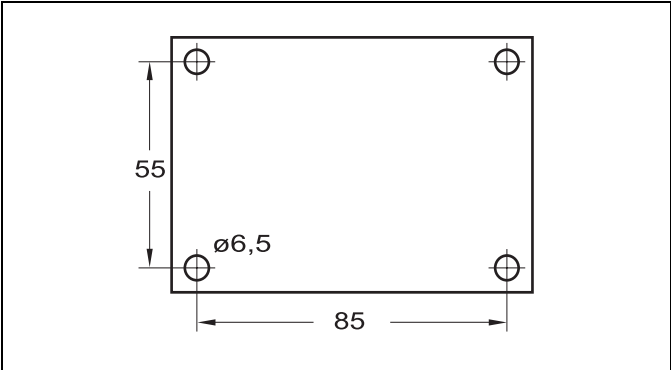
Hole pattern for the stand for the U 4814 circulating pump
